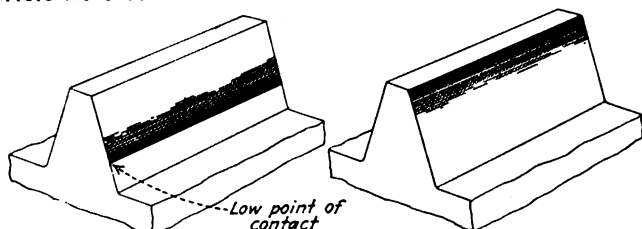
Move Pinion away from Gear FIG. 12 Move Pinion toward Gear
